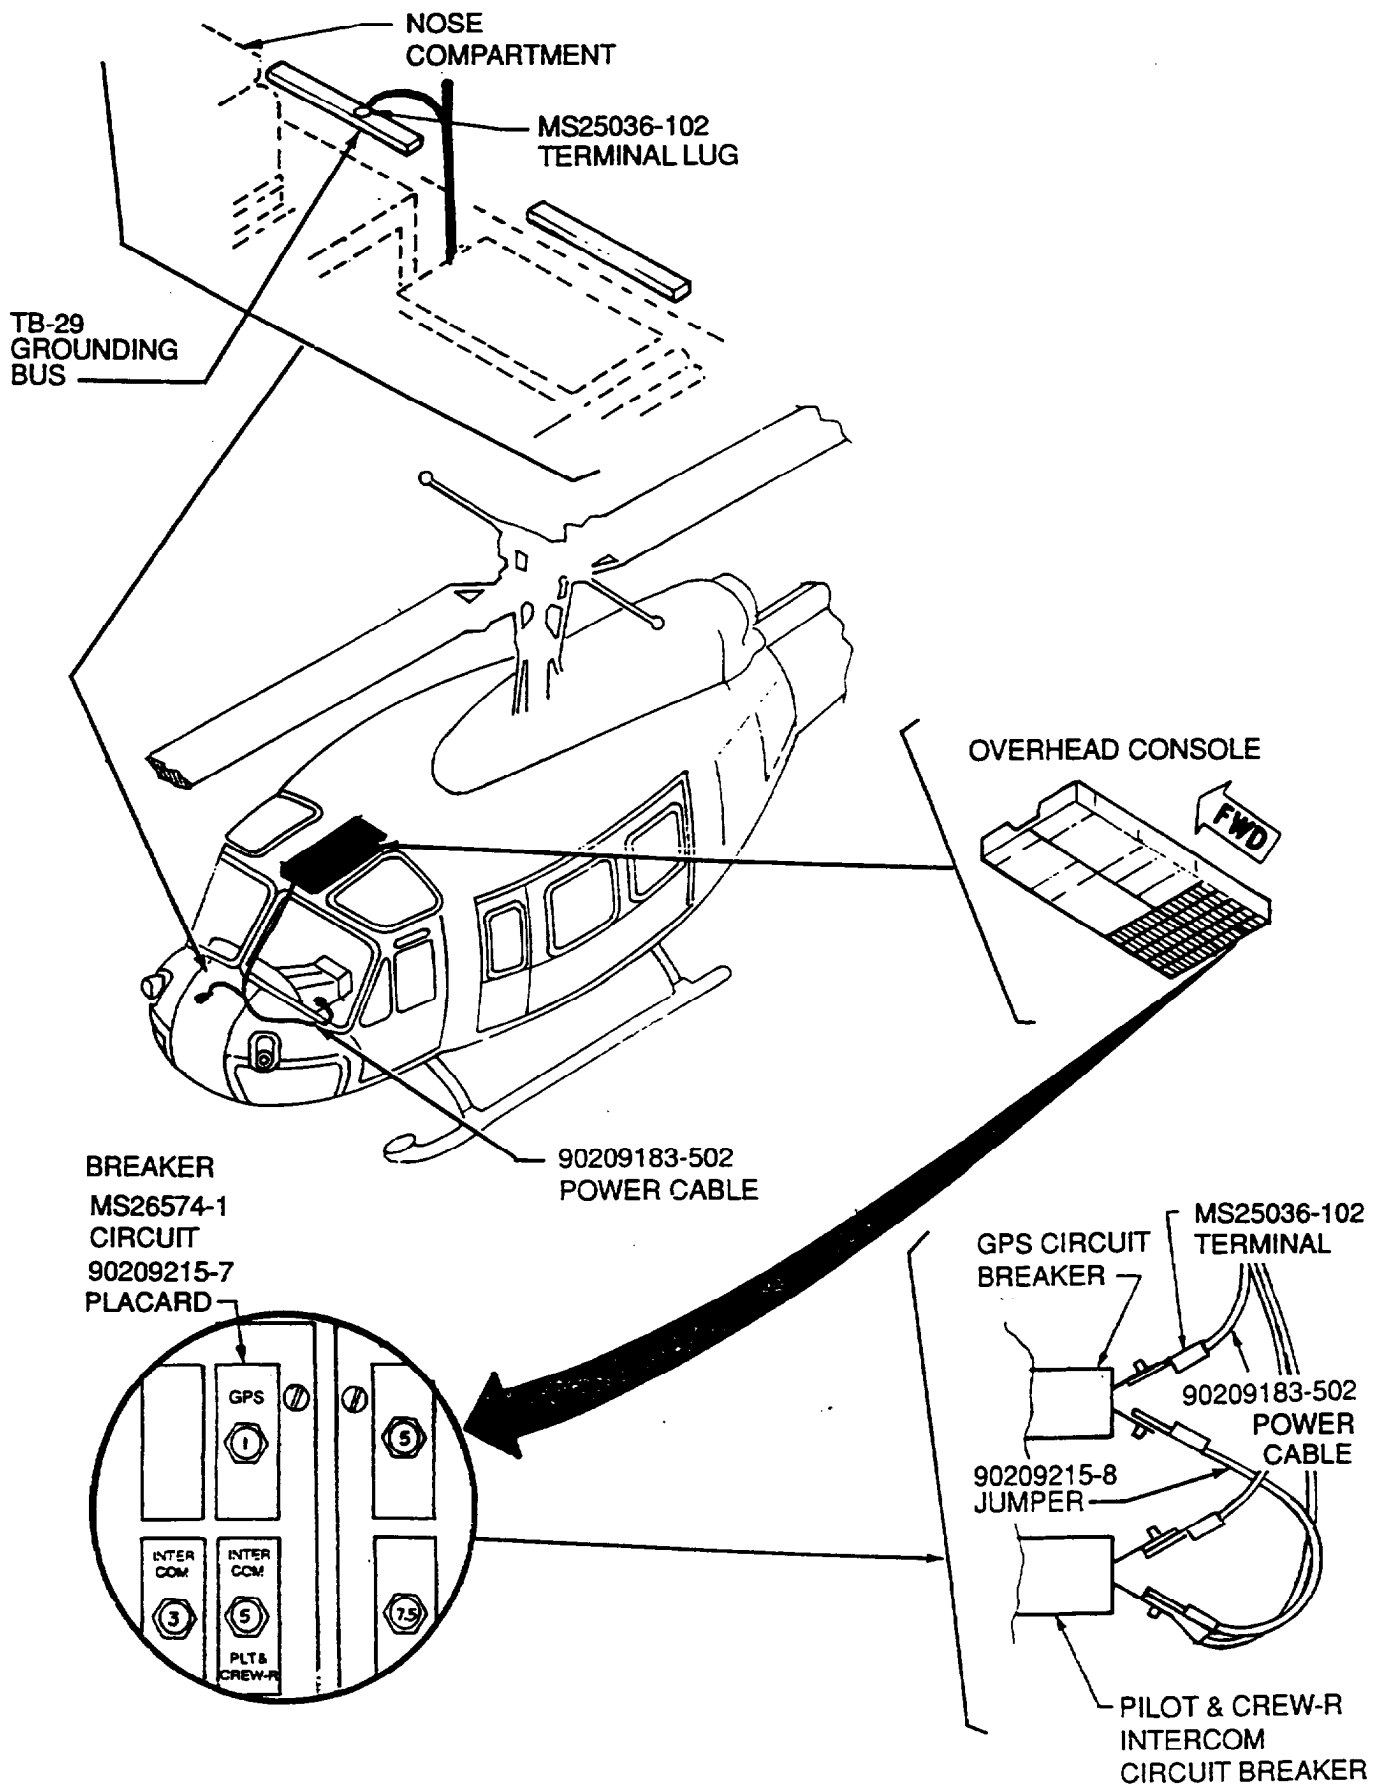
GPS Power Cable and Antenna Cable Installation (Sheet 1 of 2).
